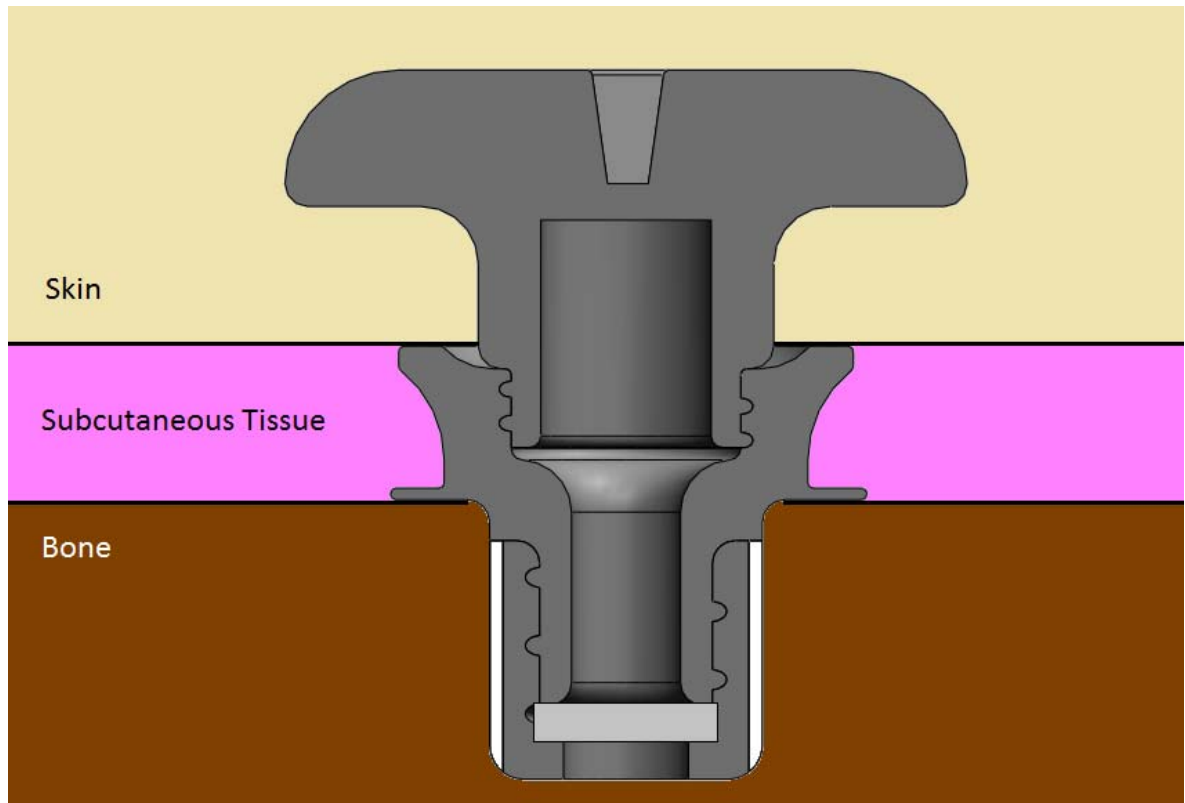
Transdermal osseointegrated implantable device assembly with 8 mm diameter silicone disc (pictured in light gray) for injection port and mesh coating layer of threaded cap (pictured in white).
